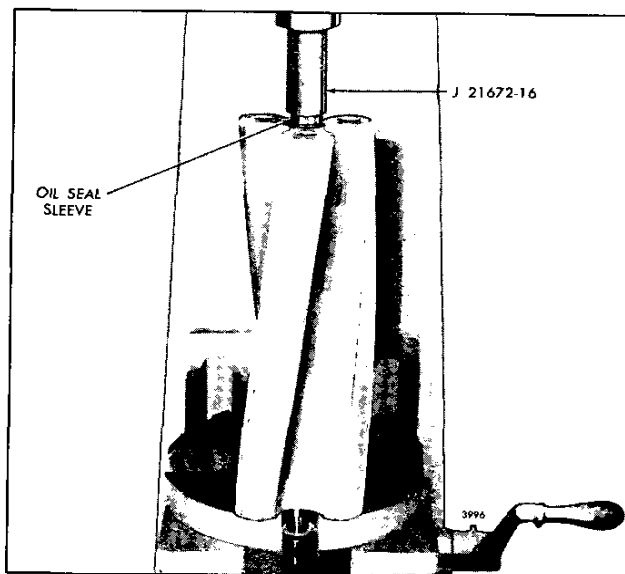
Installing Oil Seal Sleeve on Rotor Shaft
